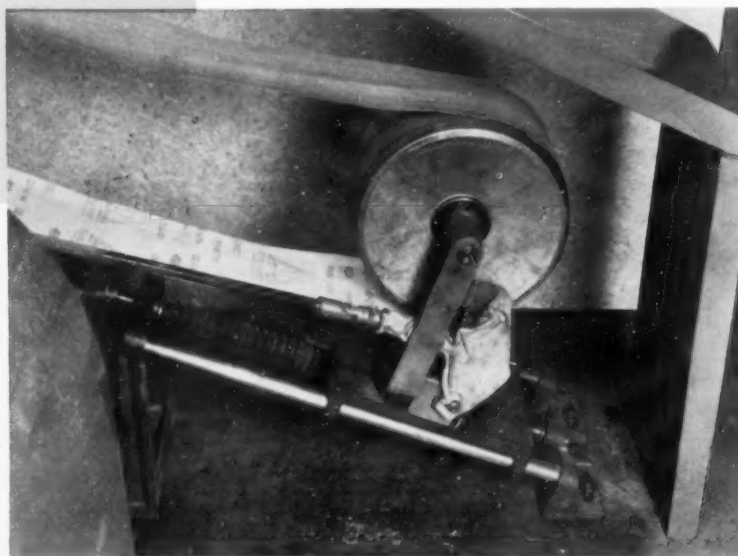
Idler pulley with screw adjustment for tension control. Screw is covered with accordion boot for protection from abrasive dust.
